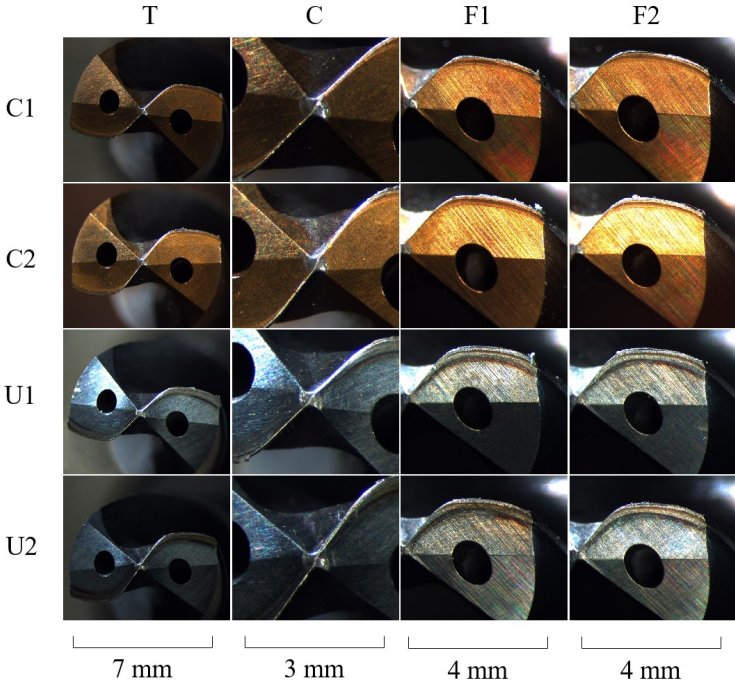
Photographs showing the top (T), chisel (C), and both flank faces (F1, F2), for both coated (C1,C2) and uncoated (U1,U2) tools after the 50th hole drilled with each tool.
